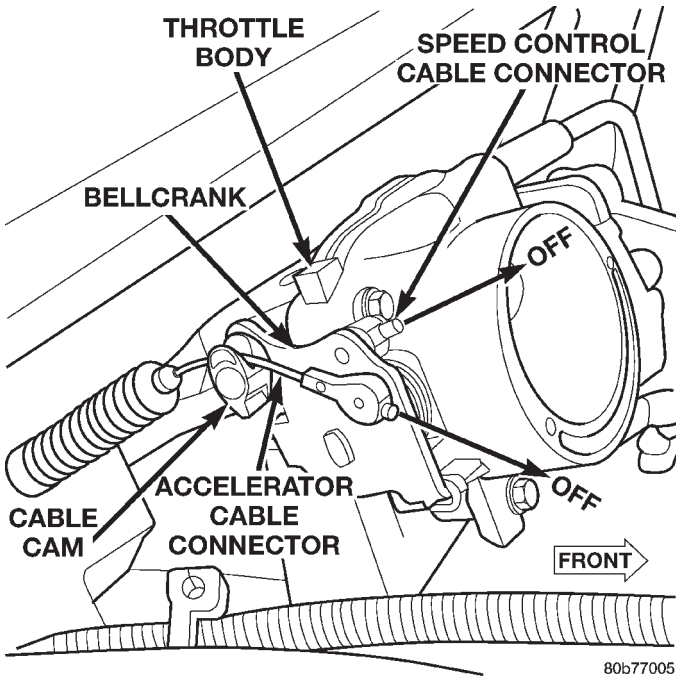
Cable Connectors at Bell Crank—4.7L V-8 Engine
